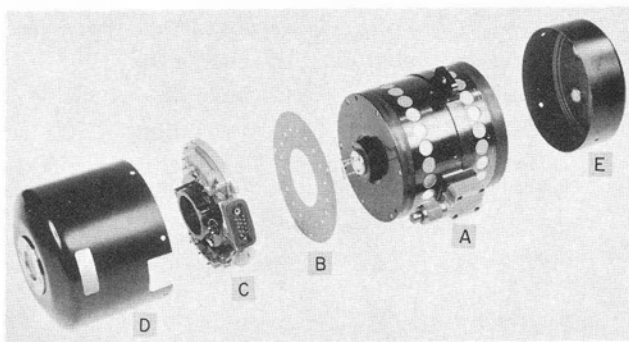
Saturn AB5-K8 Gas Bearing Assembly
